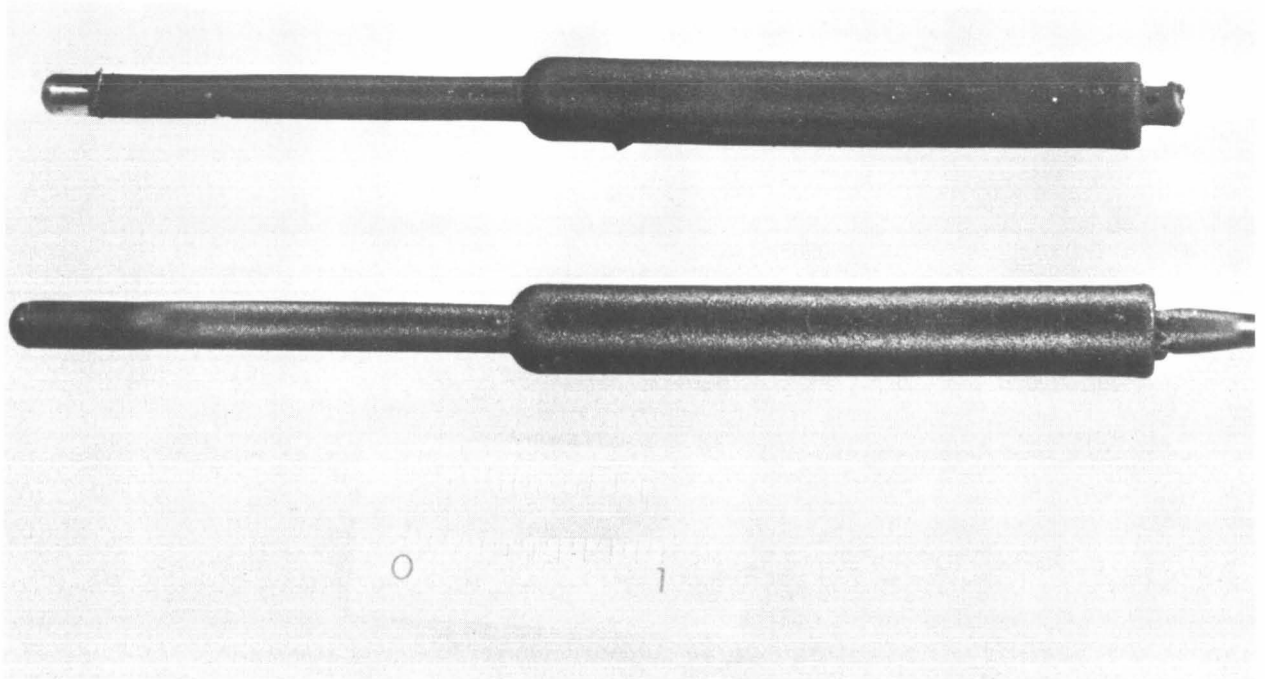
Typical Vapor Deposited Rhenium Parts (Before Grinding)
